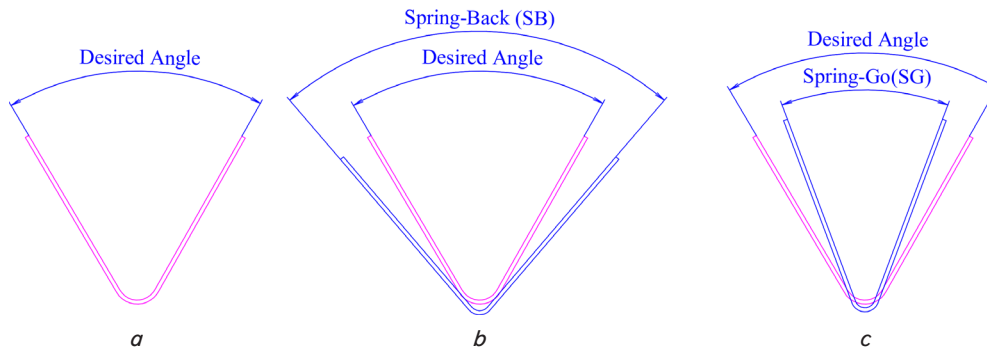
Illustration of dimensional quality from stamping: *a* – desired quality; *b* – defect spring back; *c* – defect spring go
